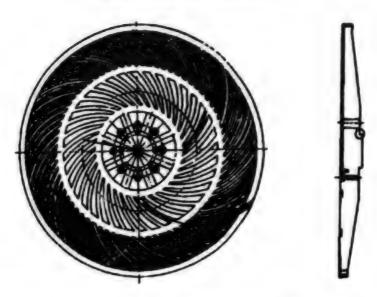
Side Coolant Supply Type Super High-Speed Wheel
